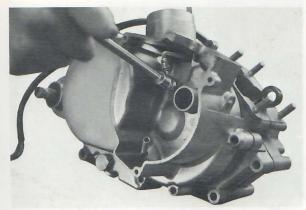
Unscrewing oil line union bolt with 8 mm wrench
